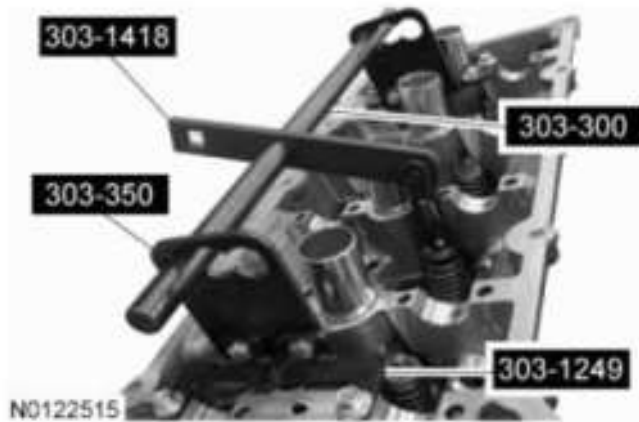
Removing Keys, Retainer And Spring Using Valve Spring Compressors
